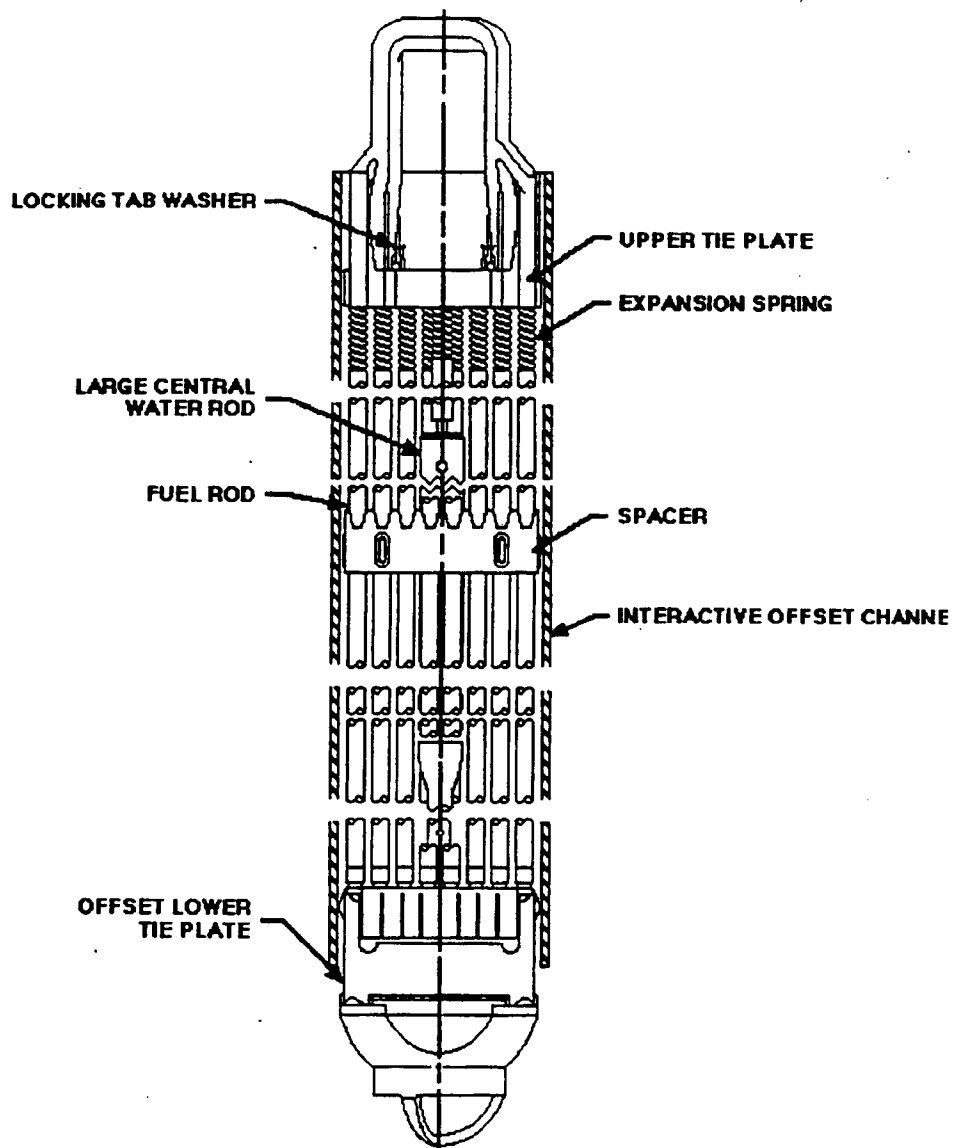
GE 8x8NB-3 Fuel Assembly
